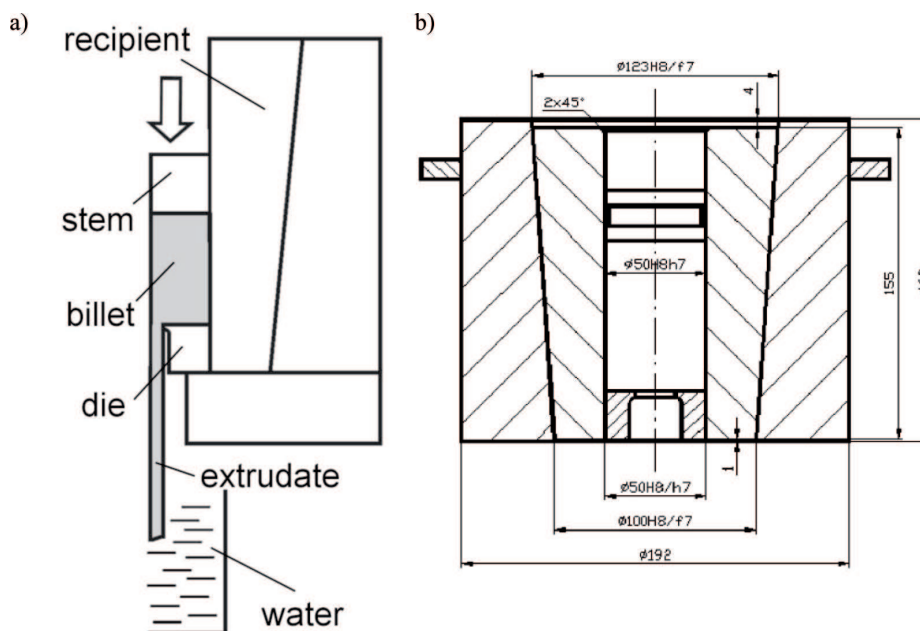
Extrusion process and tools (a) scheme of extrusion into the water (b) tools assembly
